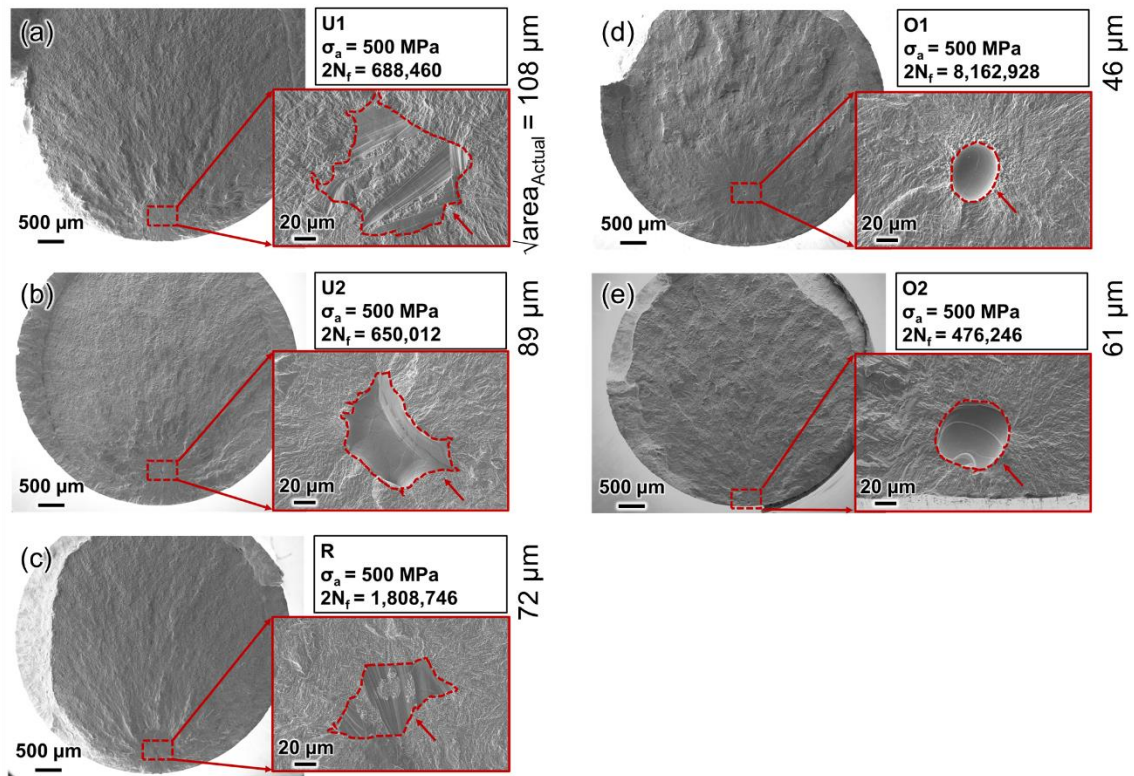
Fracture surfaces of L-PBF Ti-6Al-4V specimens fabricated using different process parameters.
